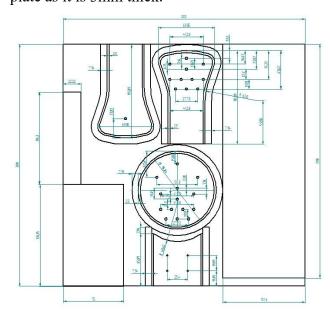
Cutting plan for 300mm x 300mm x 2.5mm thick copper sheet. Dimensions used to
